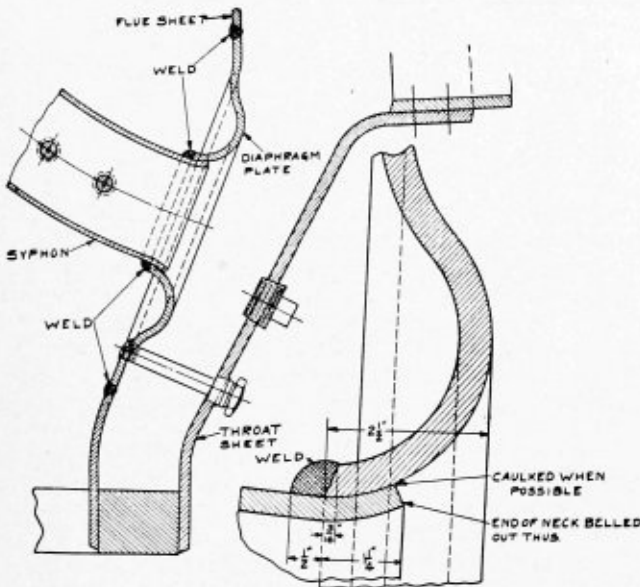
Welding the syphon to the diaphragm plate
